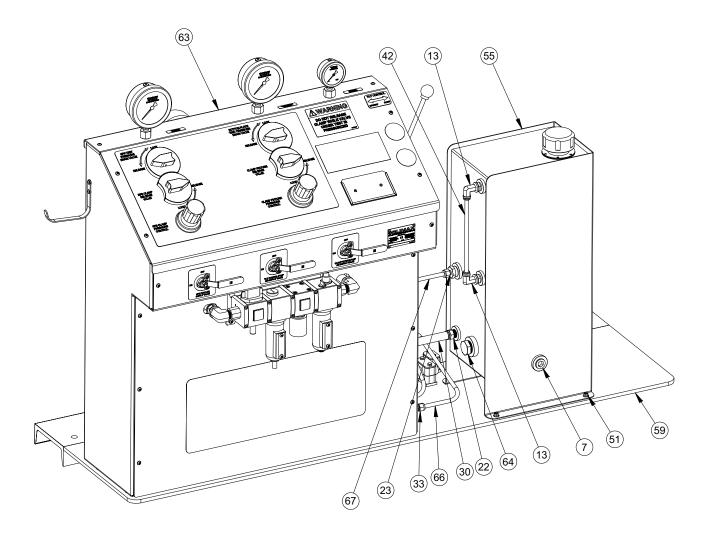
UFV-14-165T CONSOLE FRONT ASSEMBLY (P/N 88469)
